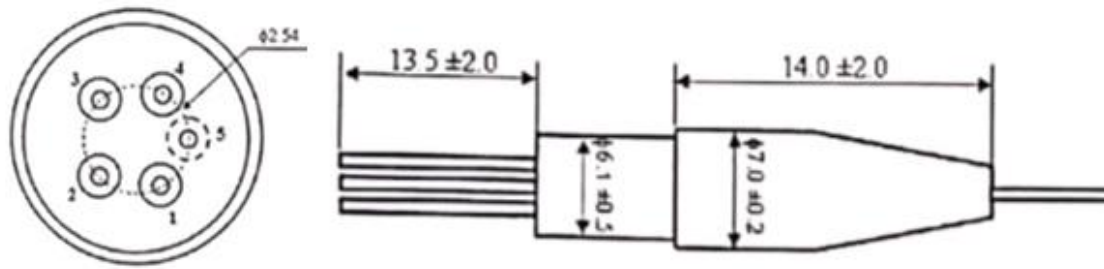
Side and bottom view of VCSEL. Dimensions in millimeters (mm) [35]
